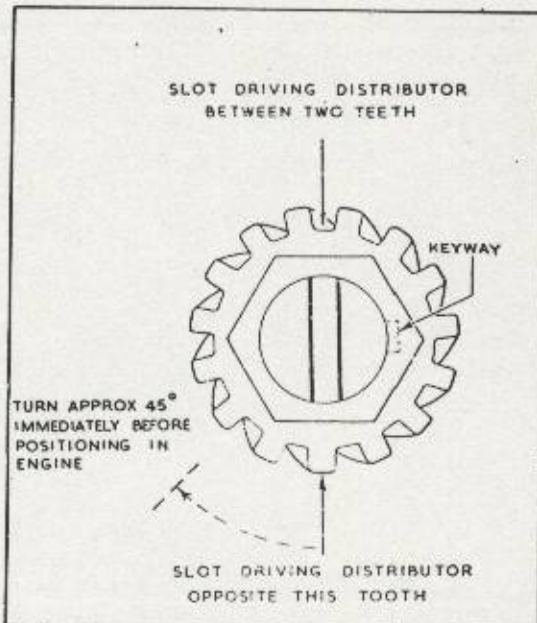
SKEW GEAR - DRIVING OIL PUMP AND DISTRIBUTOR
